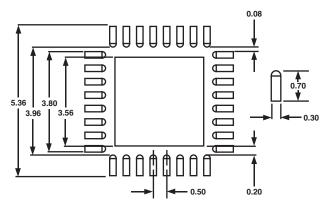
LFCSP Pad Pattern (Dimensions Shown in Millimeters)
